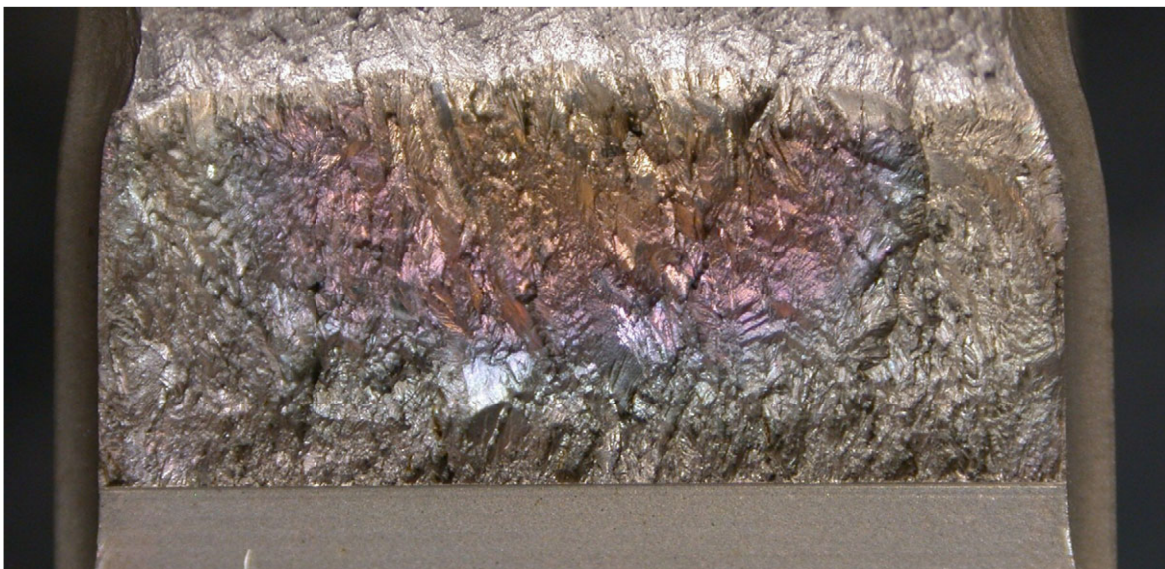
Macro photograph of CT-String defect specimen CTS 15. To achieve 30 ksi√in, the fatigue precrack length is quite long ( $a/W=0.554$ ), and the crack exposed to the test environment is the large tinted area just above the smooth machined notch. The specimen width is 0.5 inch.
